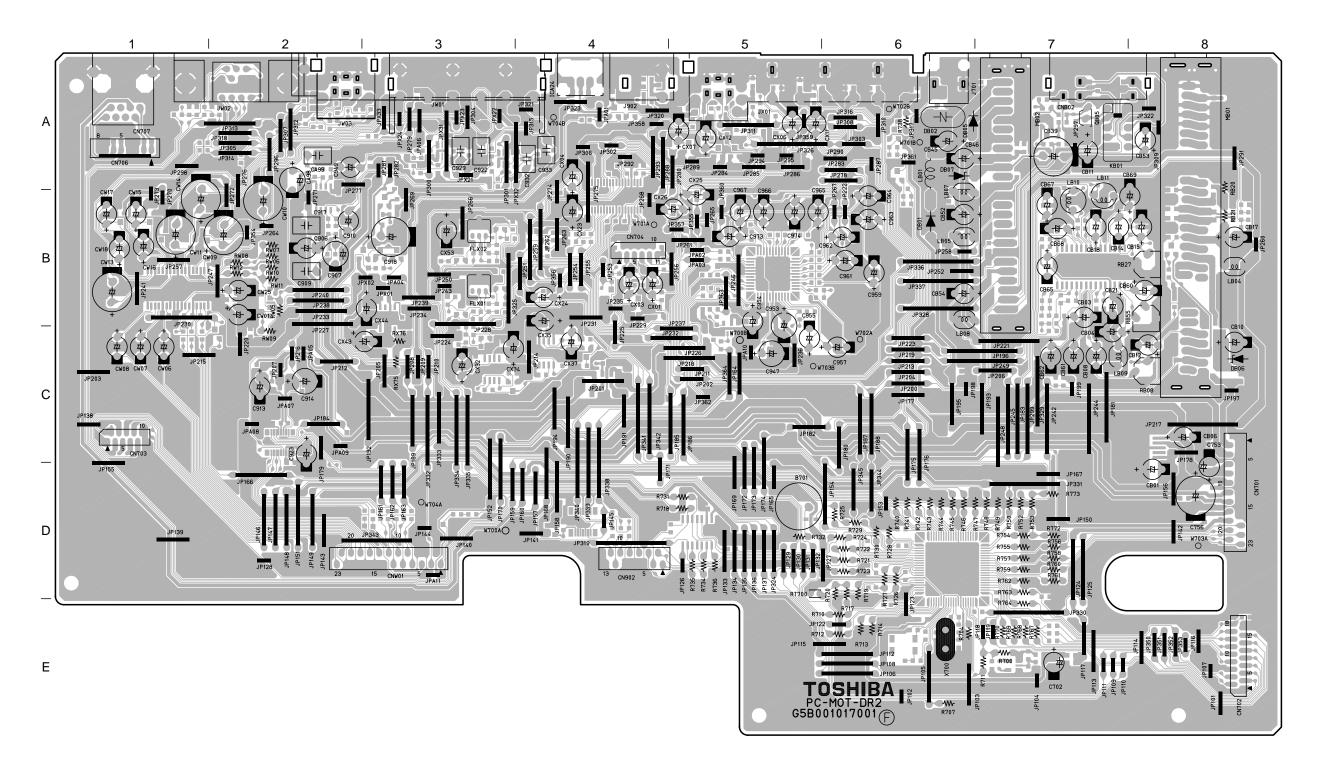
EU05 Mother PC Board (Top side)
